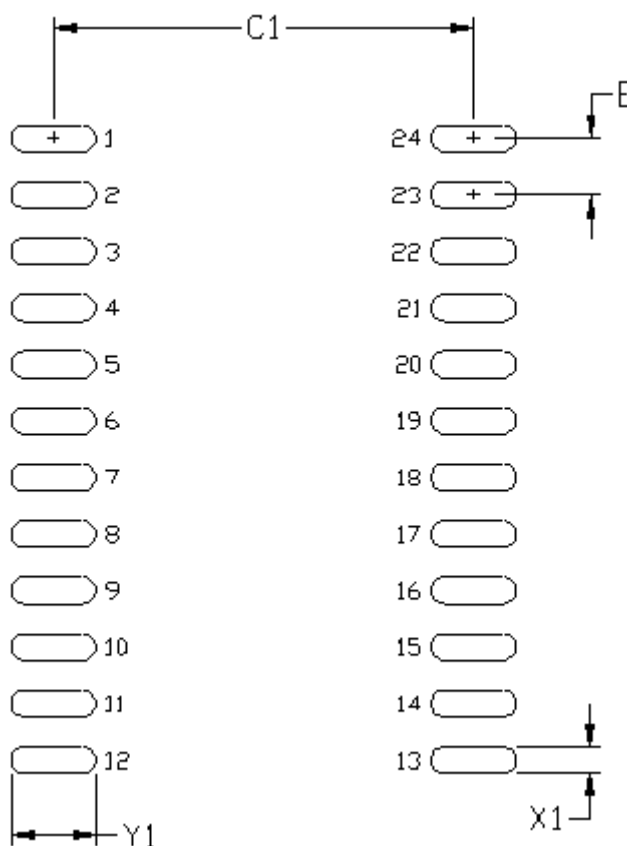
PCB Land Pattern: 24-Pin Wide Body SOIC
